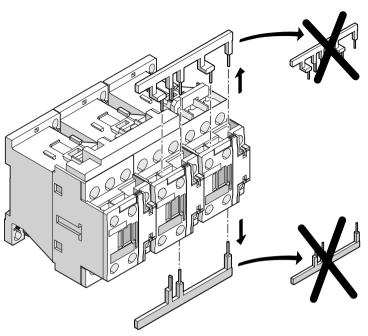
Removal of the wiring modules for connecting the control current paths on a contactor assembly for star-delta (wye-delta) start with screw-type connections of size S0
